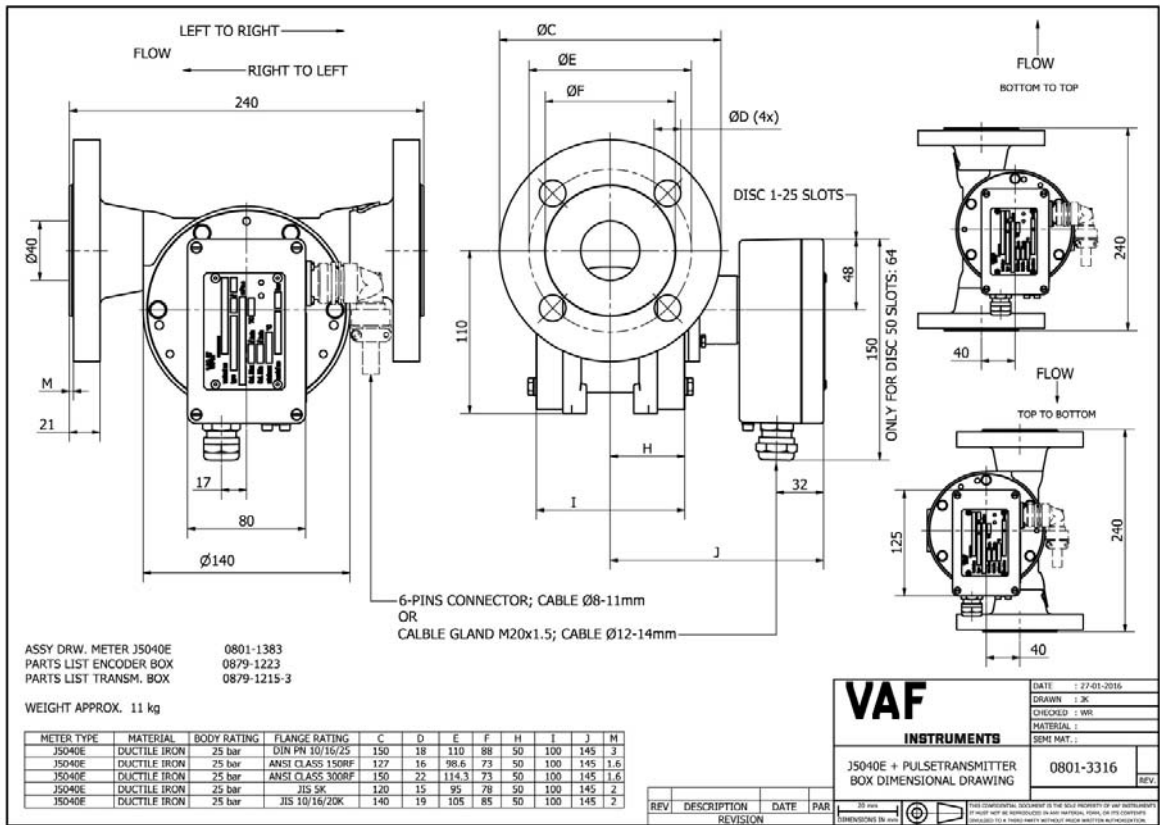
Drawing 0801-3316 – Dimensional drawing J5040E Pulse transmitter box
